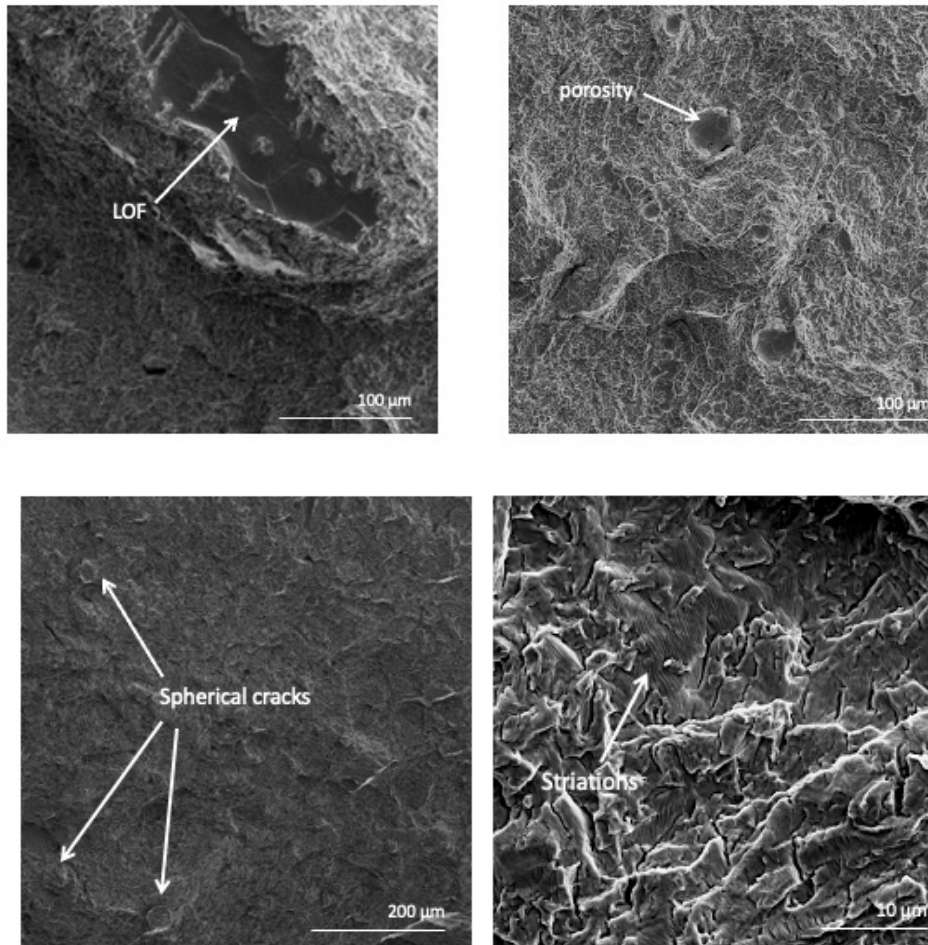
Common defects found on the fracture surface of the AB surface and after LTHIP treatment.
